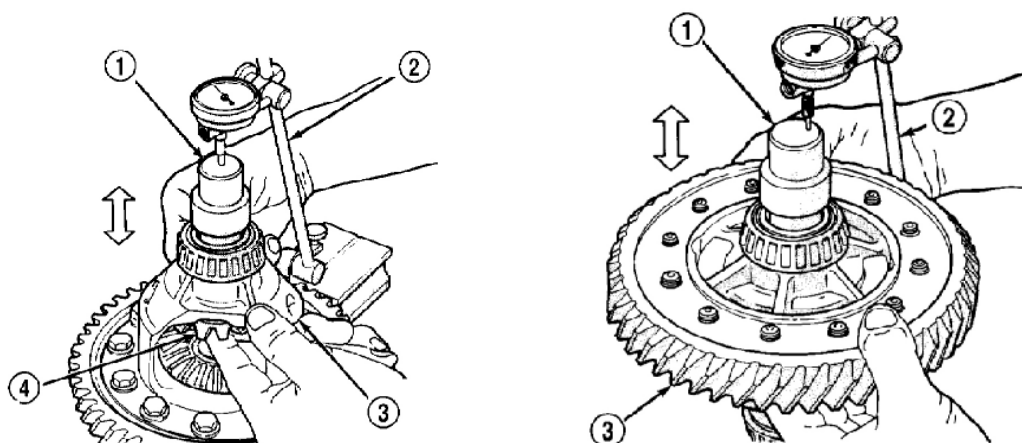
Checking the end gap of side gear (typical) Figure 3-100 Checking the end gap of side gear—typical
